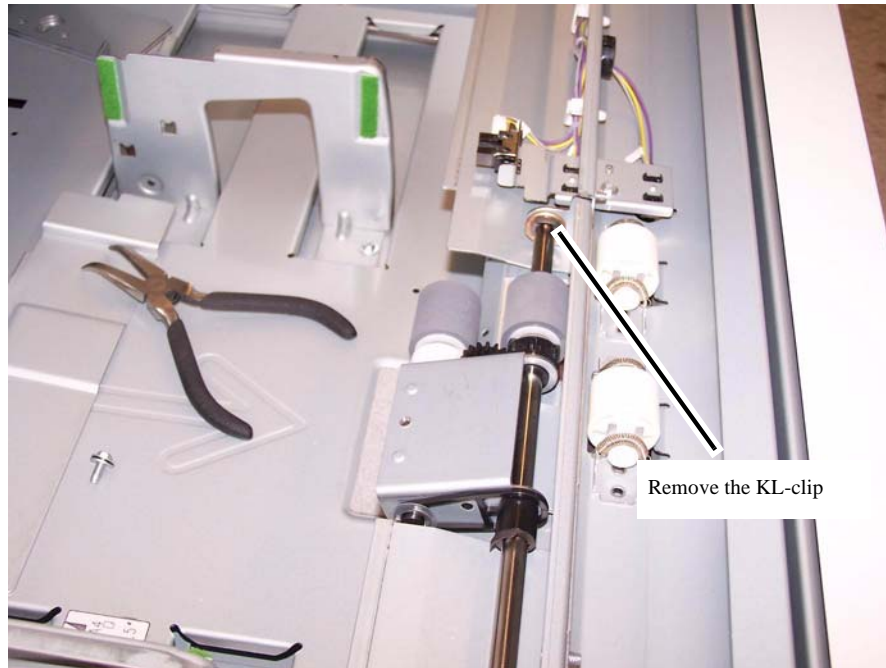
Removing the KL-clip from the RH end of the Feed Roll Shaft
